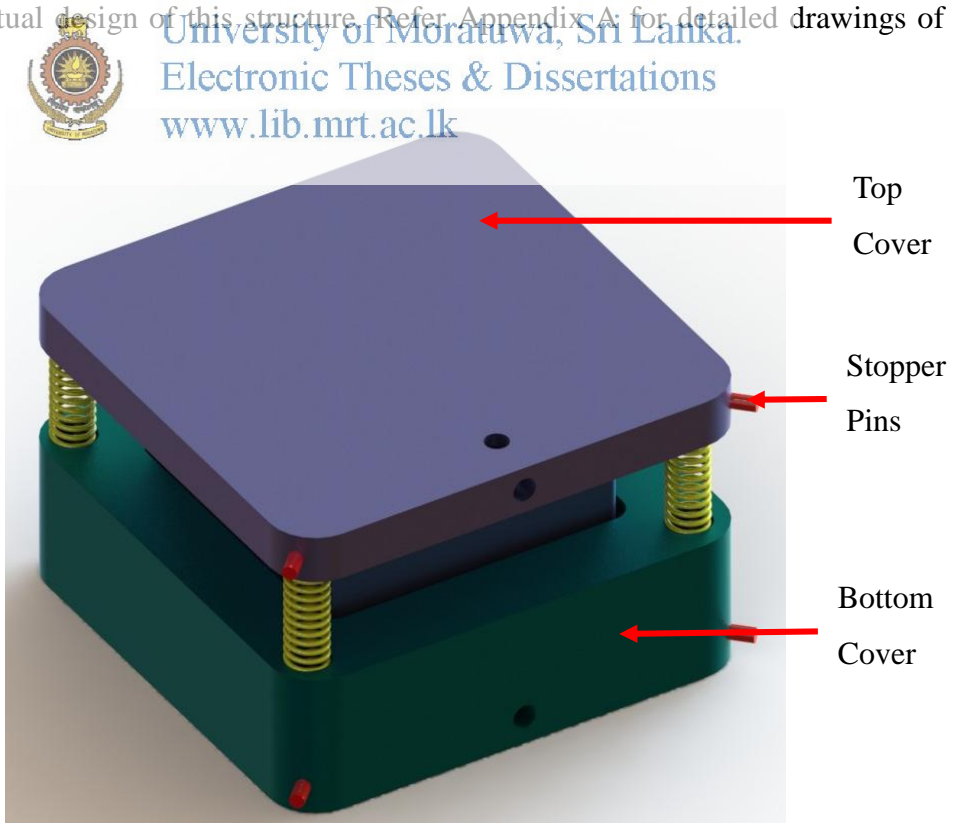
Isometric view conceptual design of structural design 1 and component assembly
